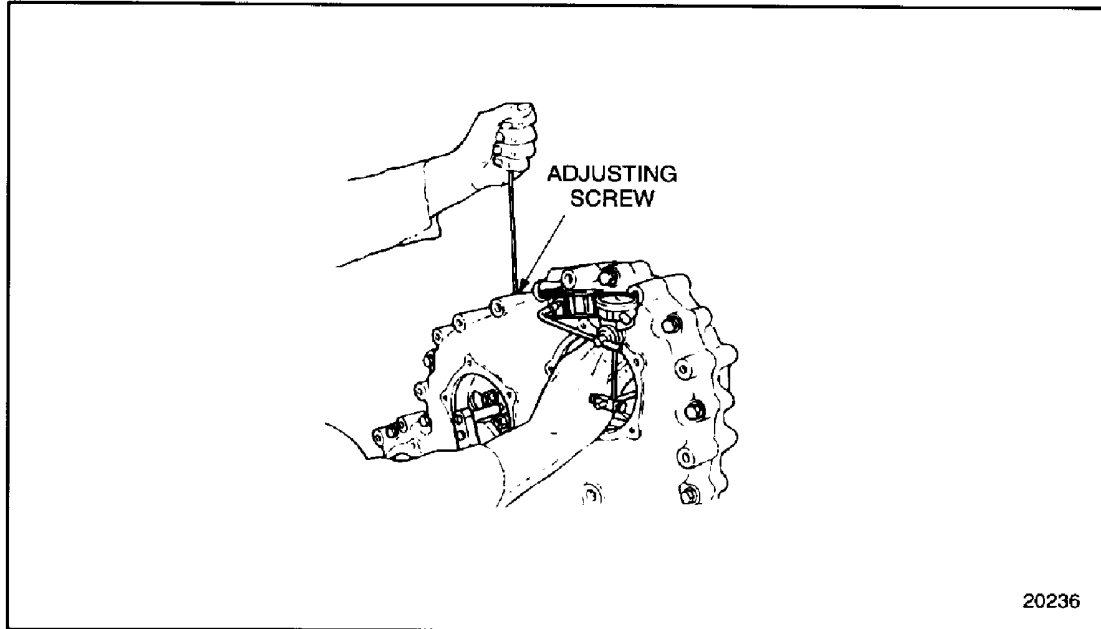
Checking Adjustable Idler Gear-to-Camshaft Drive Gear Lash
